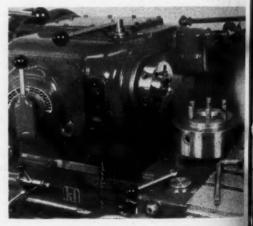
Turret lathe equipped with 6-inch Type Dl American Standard Lathe Spindle Nose, with mating 16-inch American Standard chuck. This form provides for a quick change of chucks and fixtures. Because taper pilots on both Type Al and Dl spindles are the same diameter, chucks and fixtures may be interchangeable on both types.
